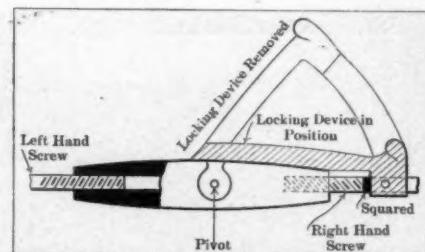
Illustrating a method used by a subscriber in locking the brake adjustment
